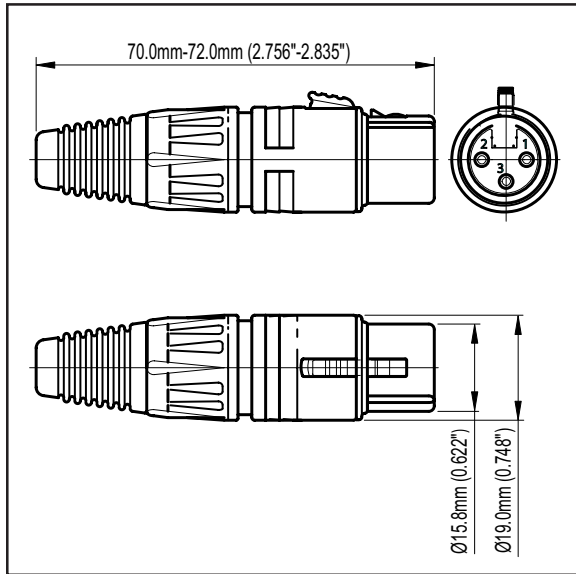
Outline drawing and dimensions for female XLR connector used on DC-I50/XLR and DC-I100/XLR signal cables.
